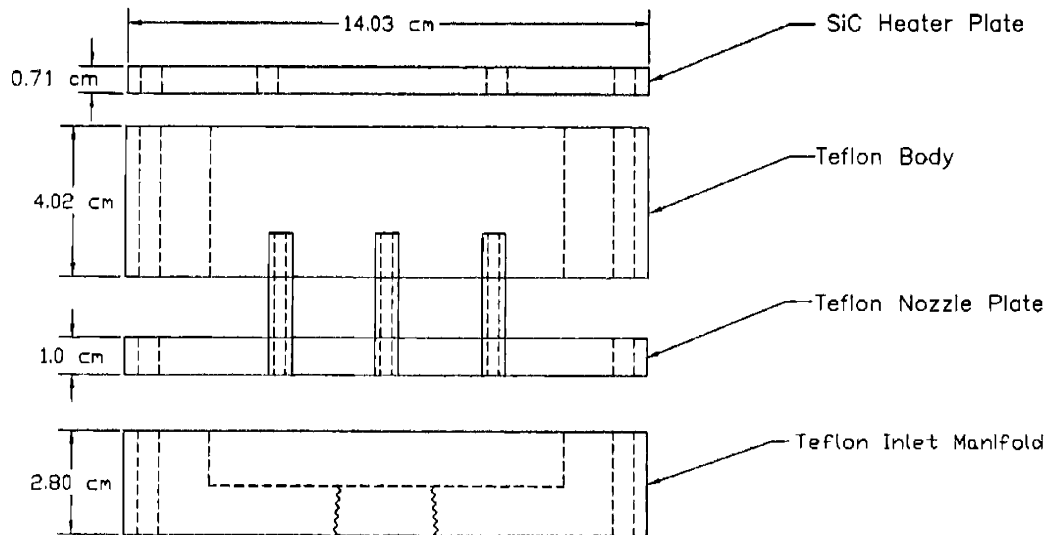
Schematic of the target module consisting of a Teflon manifold, nozzle plate, body, and a silicon carbide heating plate.
